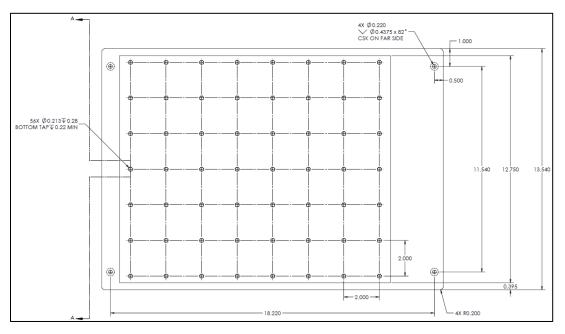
Bolt Hole pattern, dimensional drawing.
